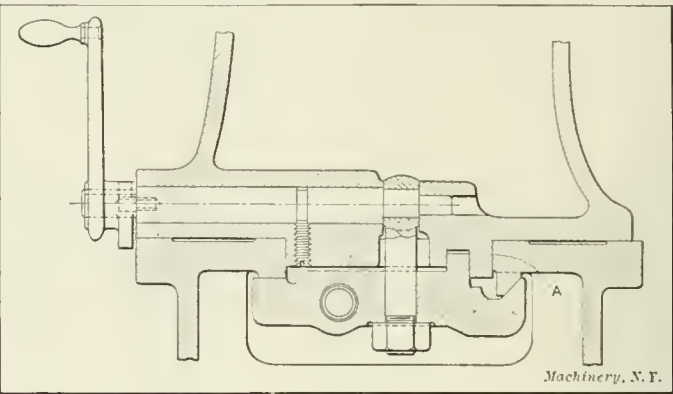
Eccentric Action Clamping Device used on Chucking Lathe
